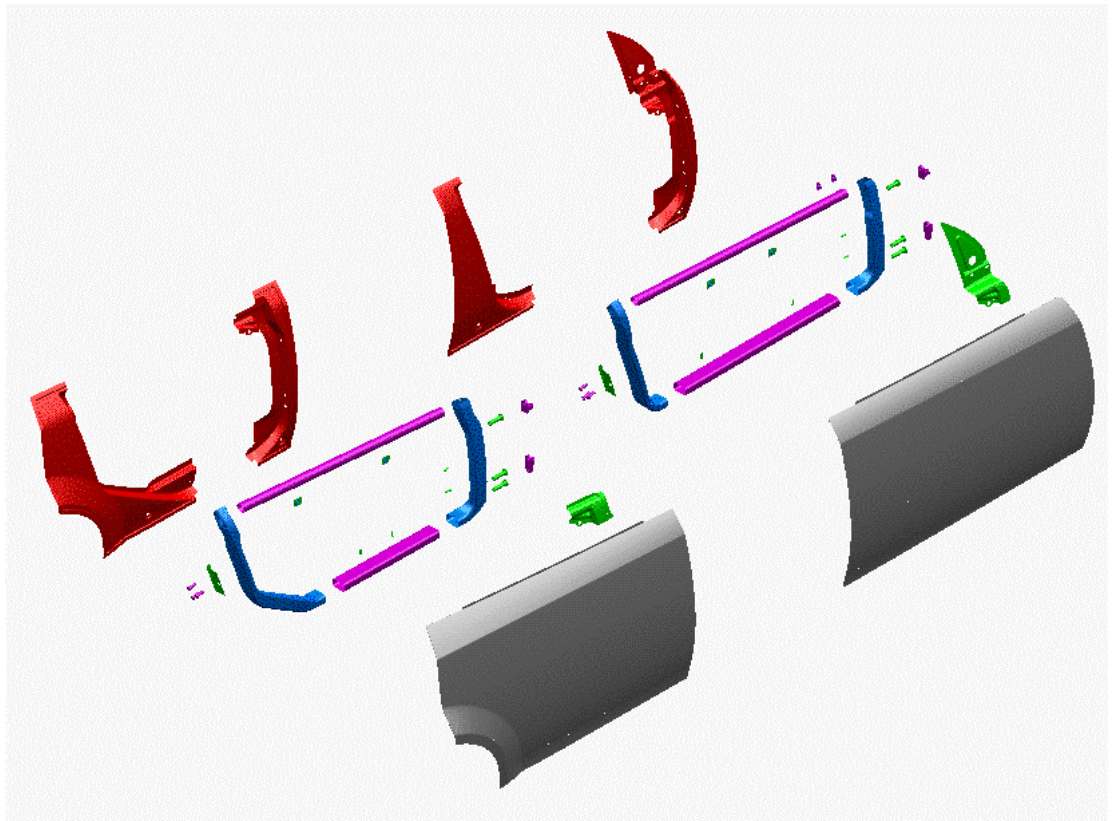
Exploded view of PNGV-Class front and rear door structure
